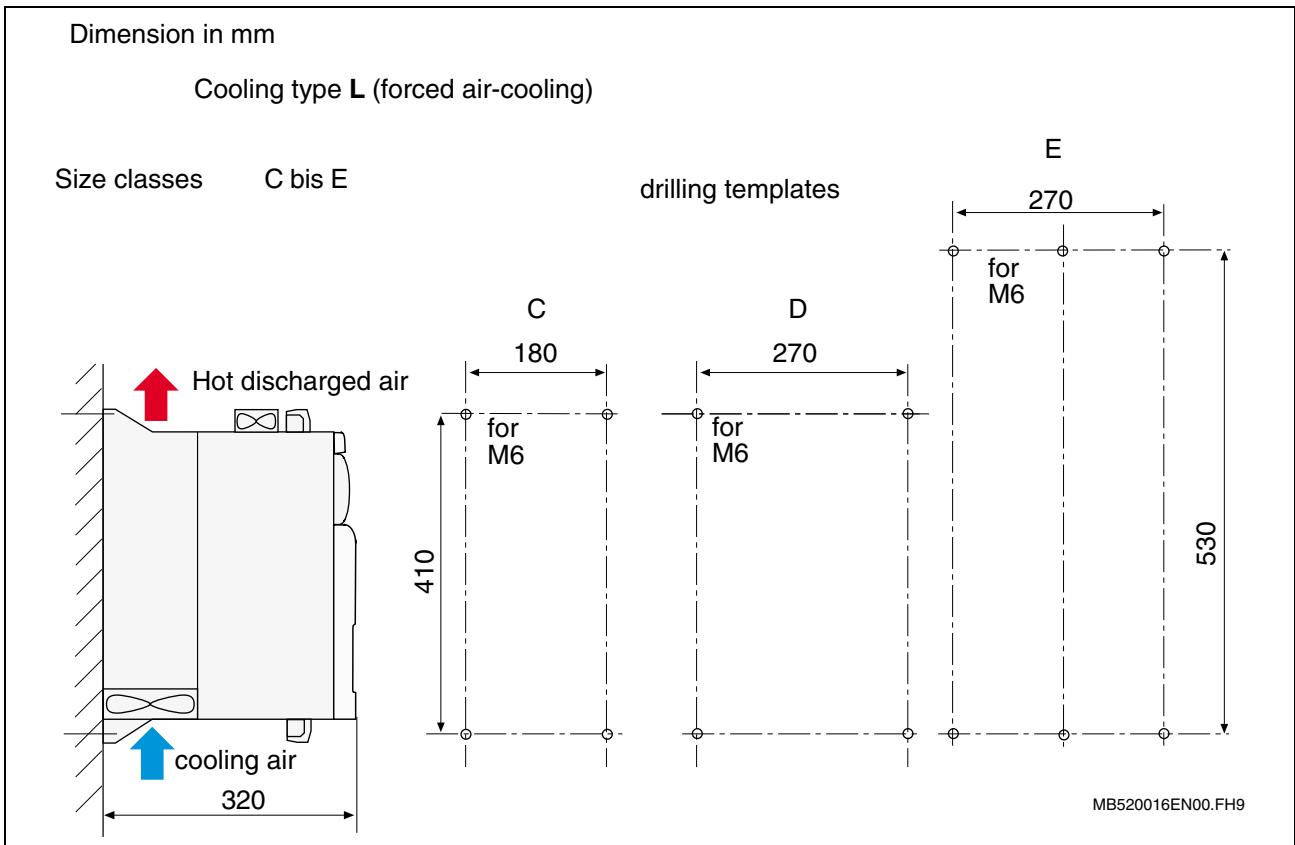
Dimension sheet for cooling type L, size classes C, D, E
